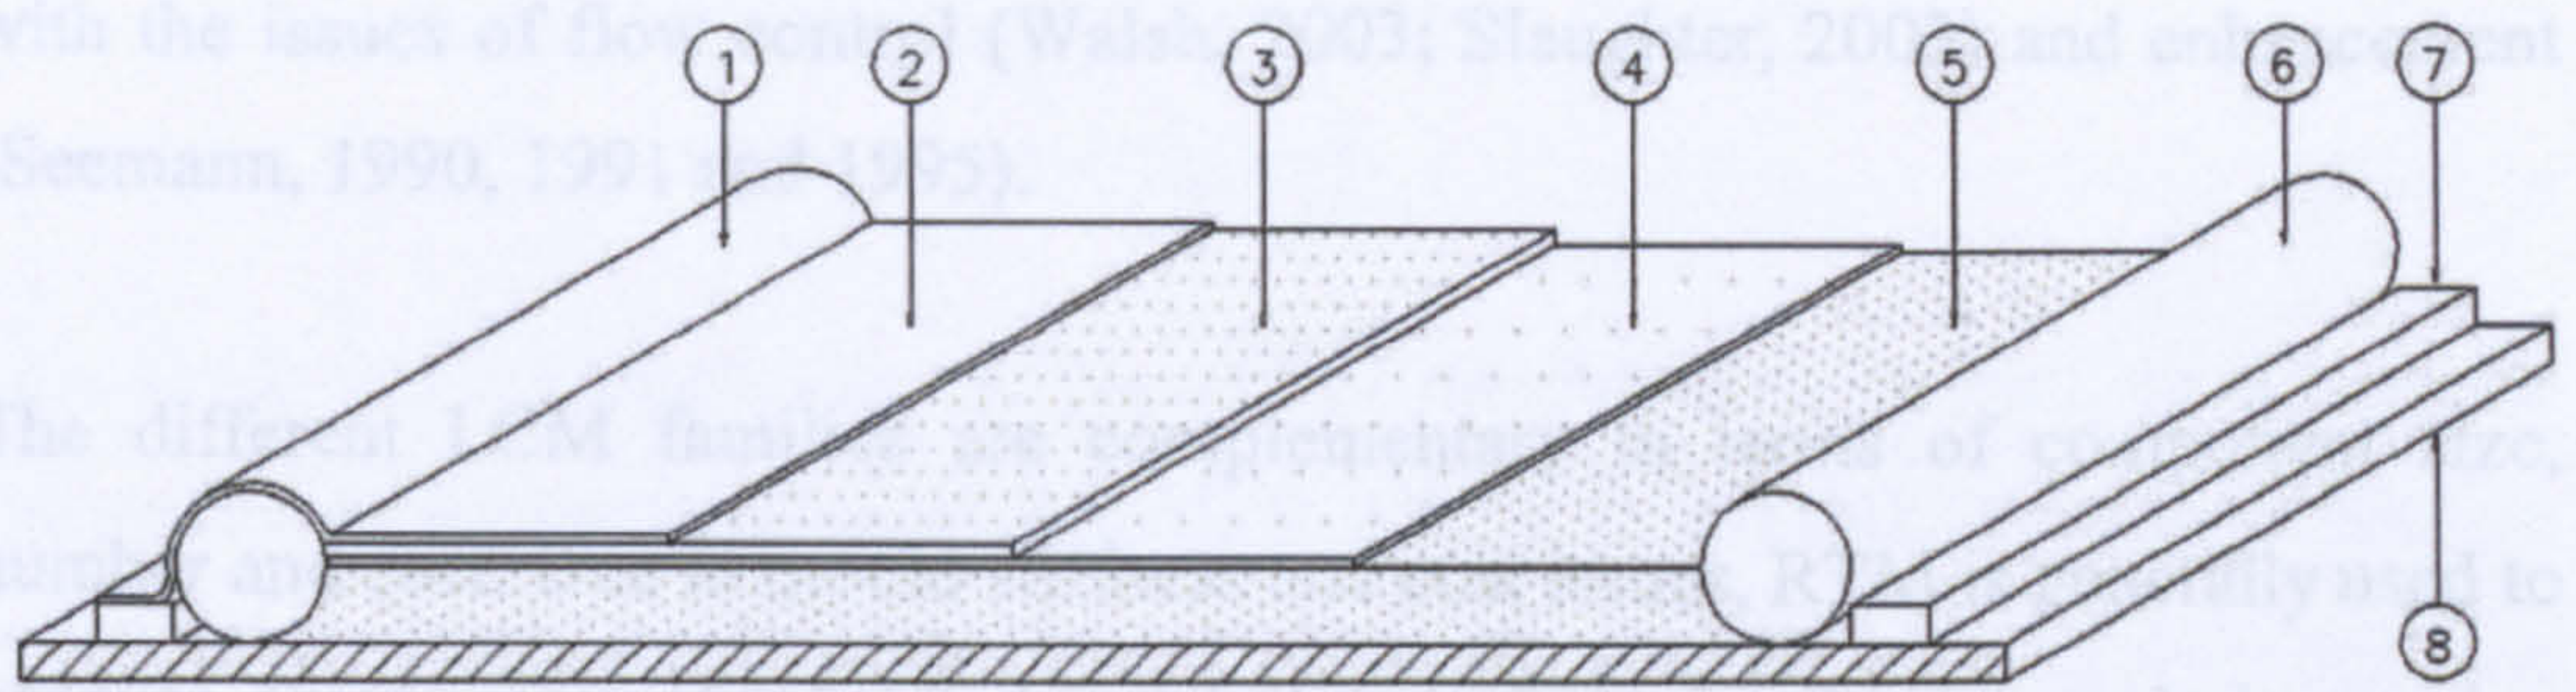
VI mould assembly: 1 – inlet, 2 – vacuum bag, 3 – distribution medium, 4 – peel ply, 5 – reinforcement, 6 – outlet, 7 – vacuum seal, 8 – mould die
